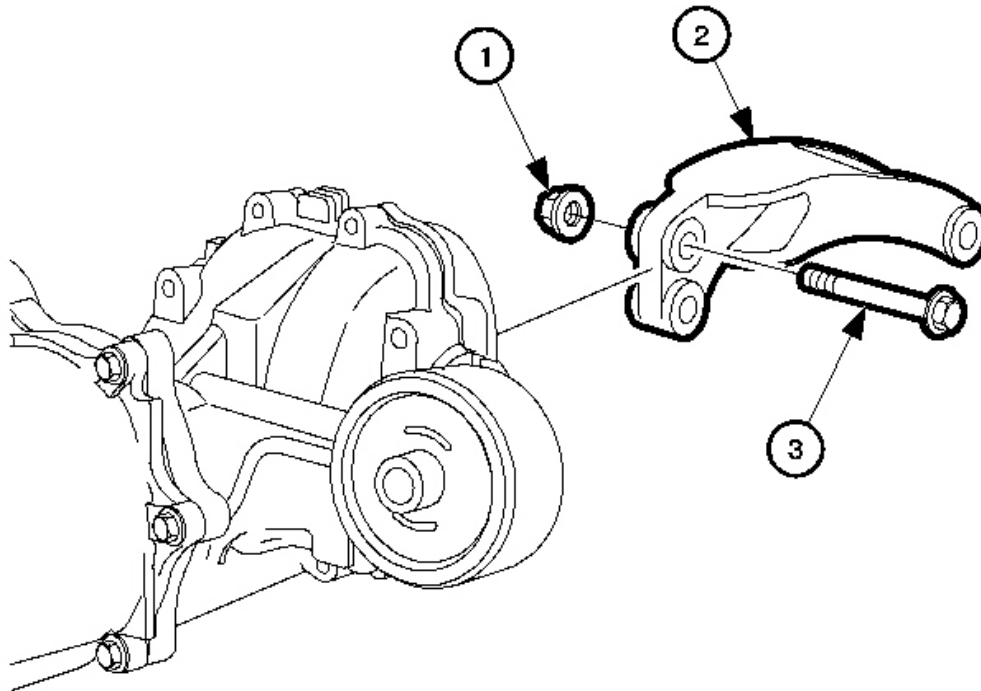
Removing/Installing Nut & Bolt From The RDM Mounting Bracket
